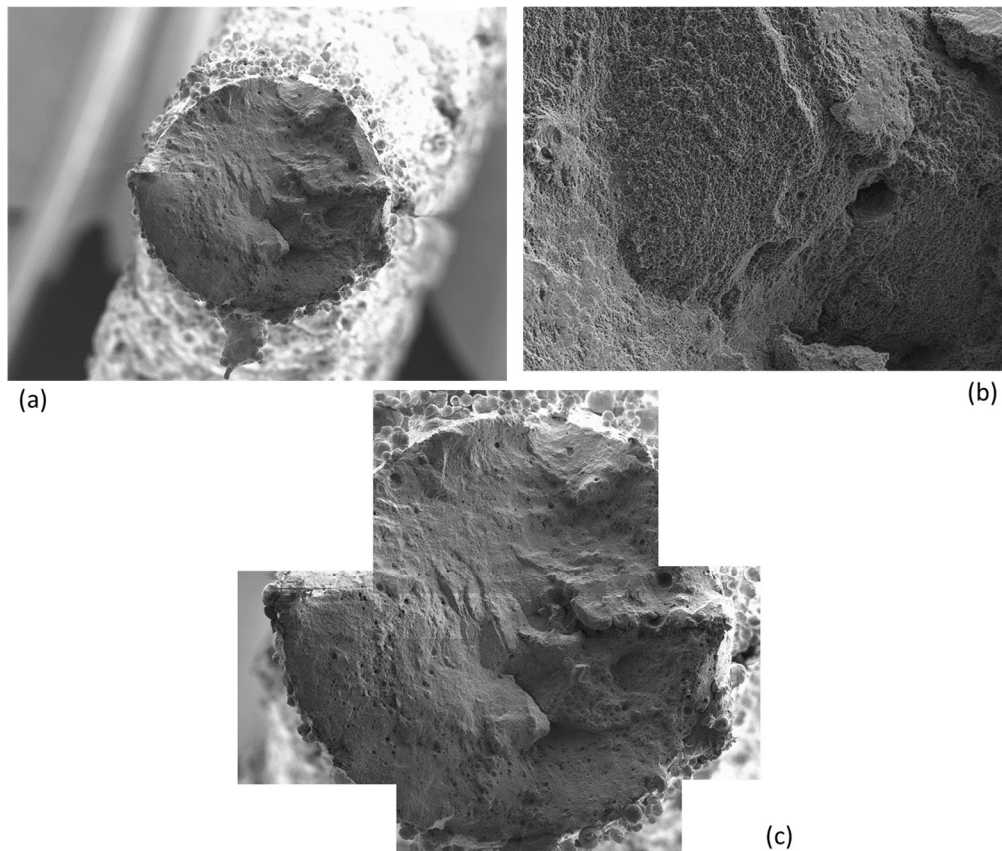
SEM images of the fracture surface for a single ligament test piece (bottom half)
